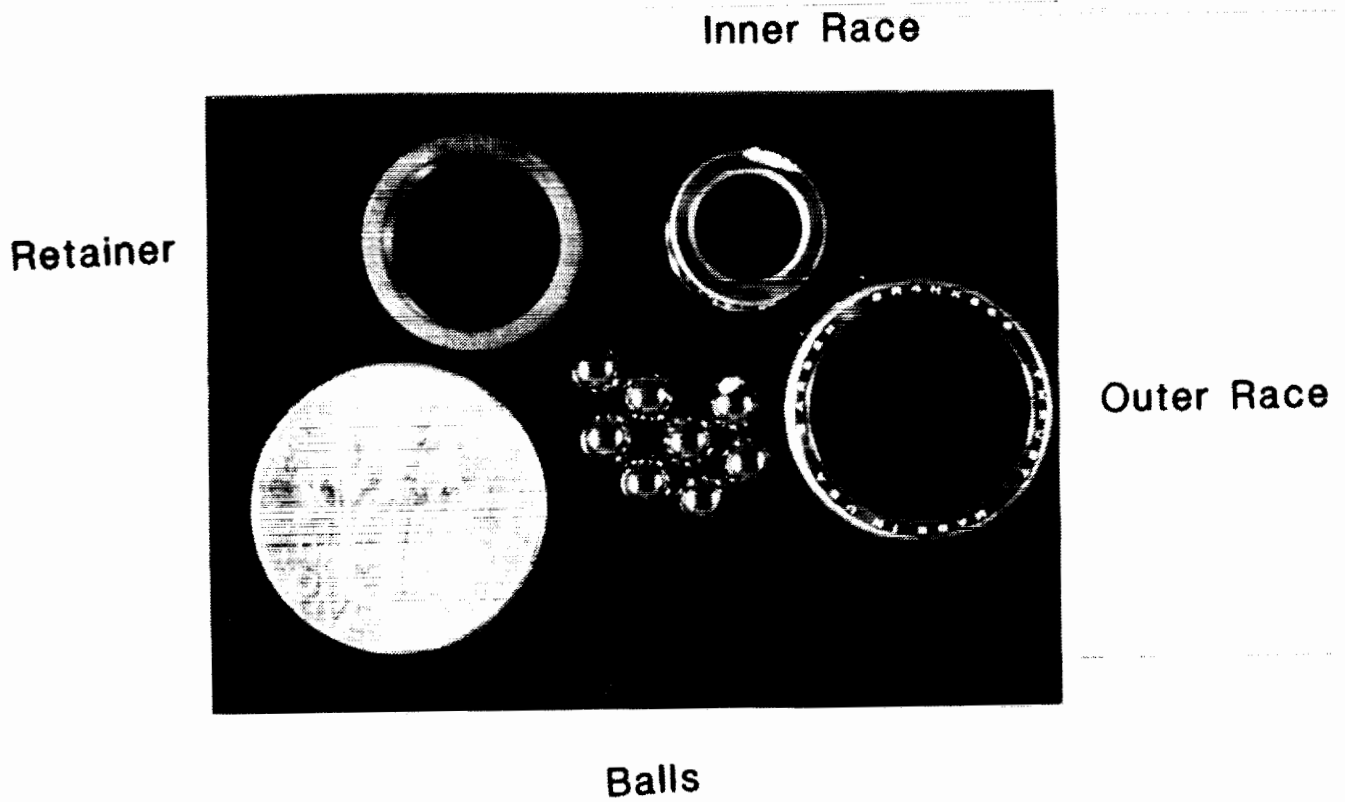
Disassembled new gyroscope bearing E2 shown with dime to indicate size.
